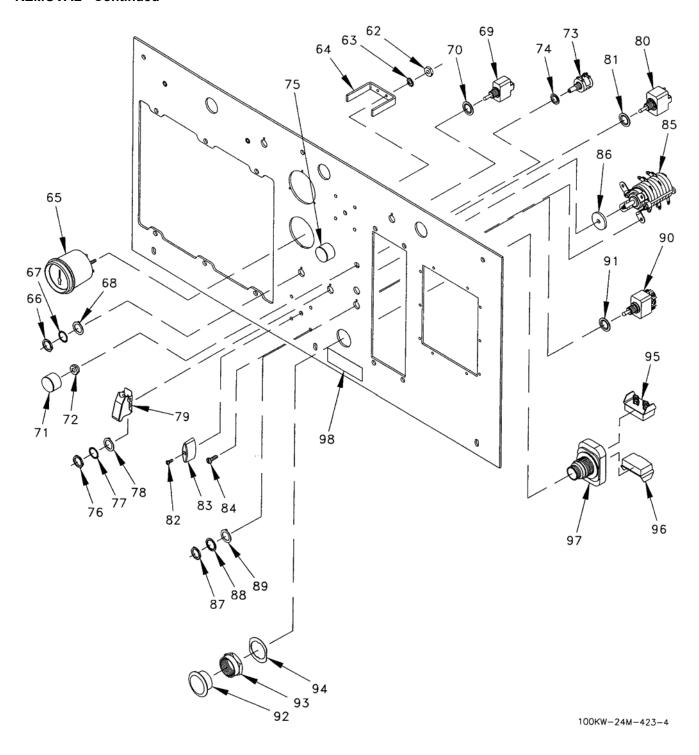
Control Box Panel Assembly (Sheet 4 of 4).
